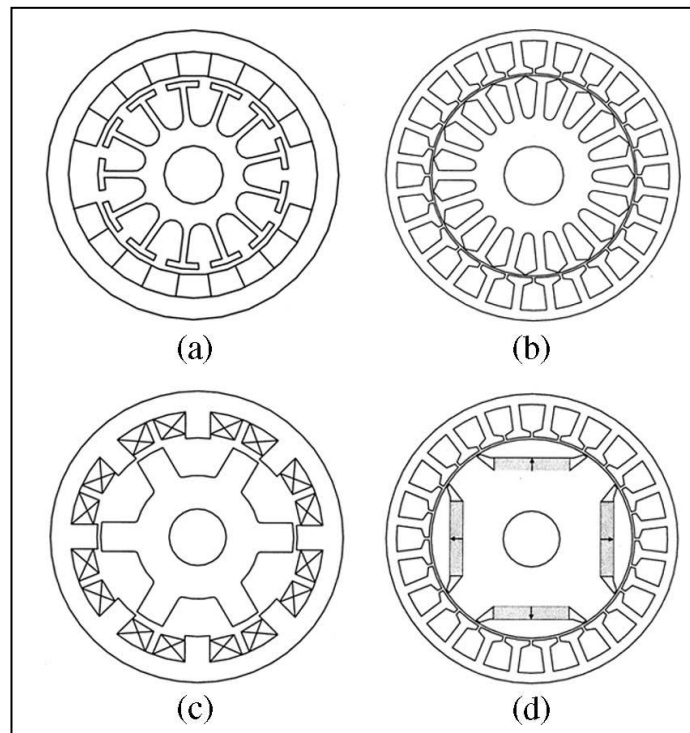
(a) DC Drive, (b) Induction Machine, (c) Switch Reluctance Machine and (d) PM Machine [24].
